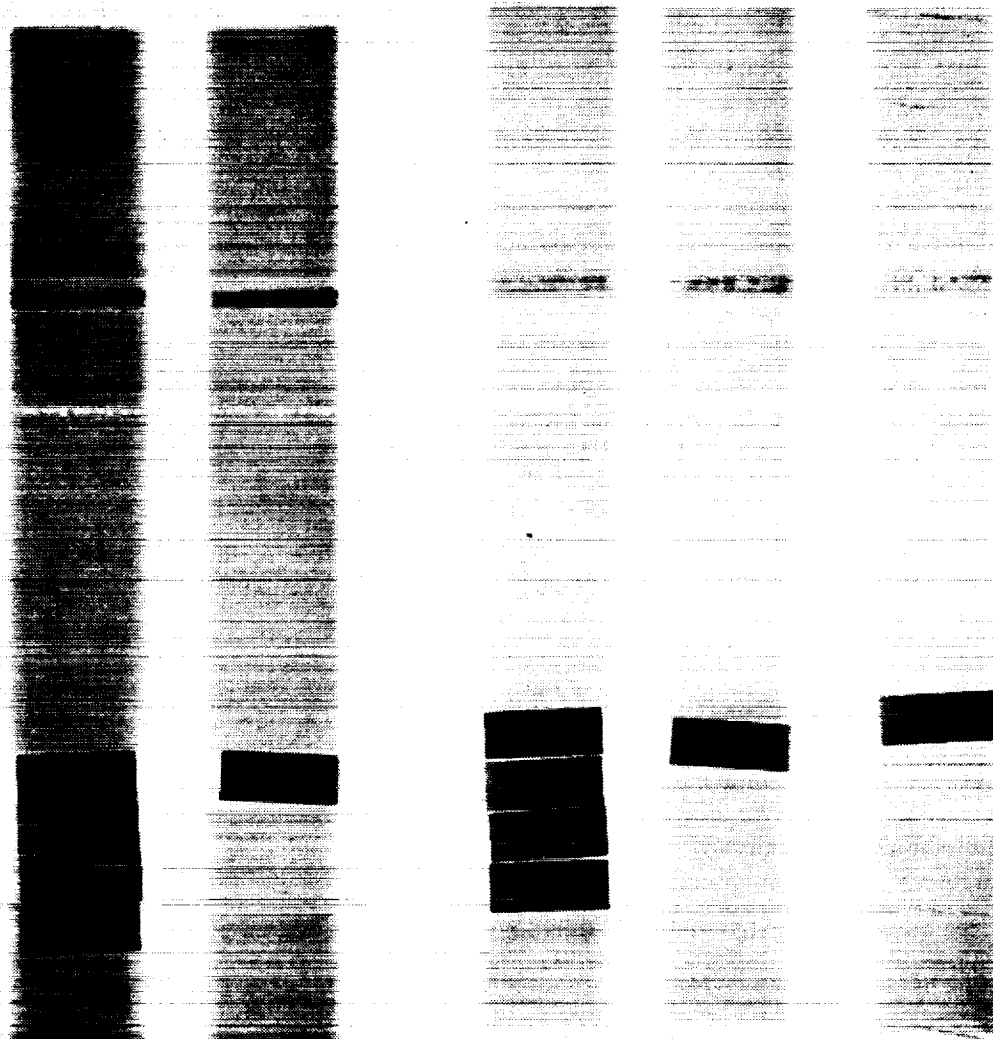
Contact Prints of Radiographs Showing Porosity in 0.050 in. (1.3 mm) Thick 8090-T6 to 0.120 in. (3.0 mm) Thick 2090-T83 weld with 0.005 in. (0.13 mm) Removed by Chemical Milling.
